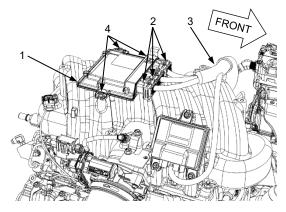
ECM (1), Engine Harness ECM Electrical Connectors (2), Engine Harness (3), ECM Mounting Bolts (4)
